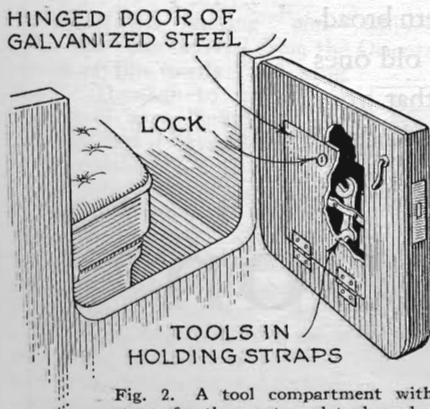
A tool compartment with straps for the most used tools and a galvanized steel door fitted with a good lock will keep the tools safe
